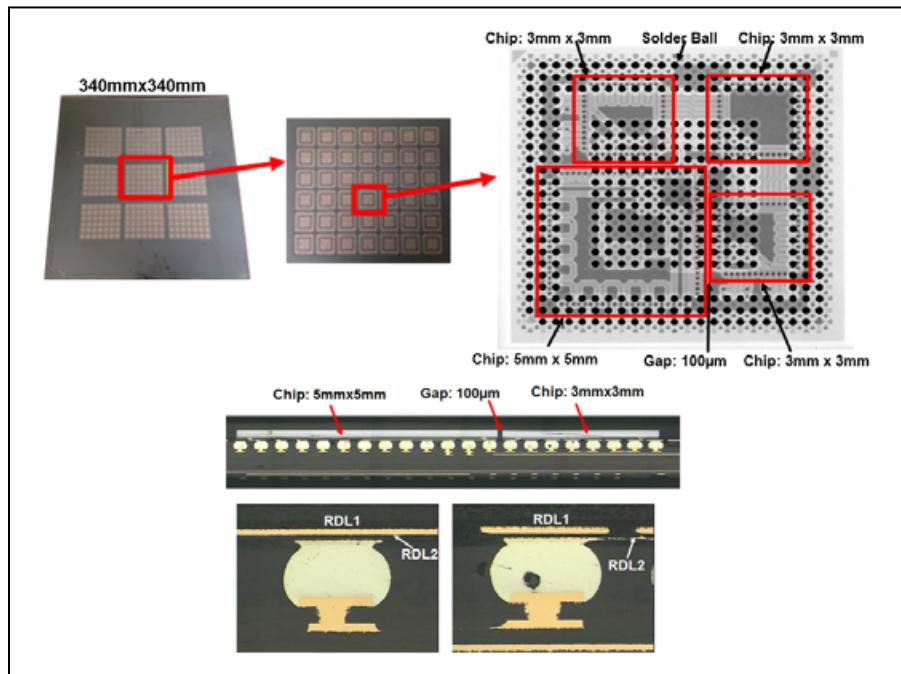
Panel size, individual package, and PCB assembly of the FOPLP PCB/ABF/SAP + LDI.
